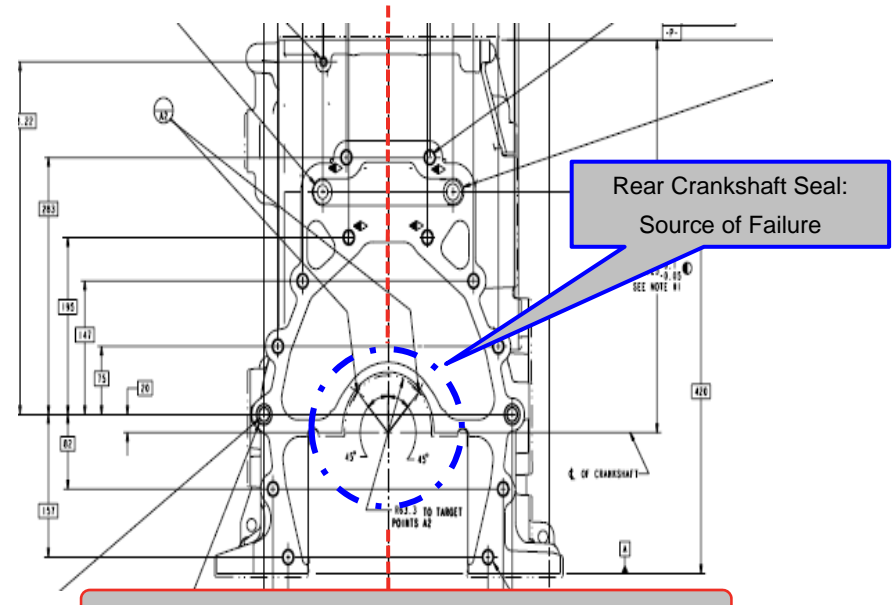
CAD drawing: rear face of engine block.<sup>4</sup>
